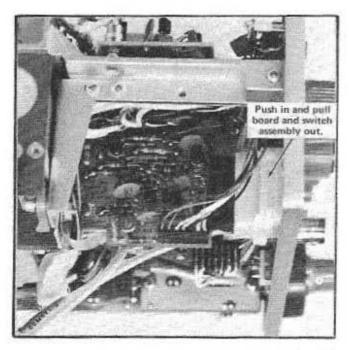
Latch assembly for the vertical display board and switch assembly,
